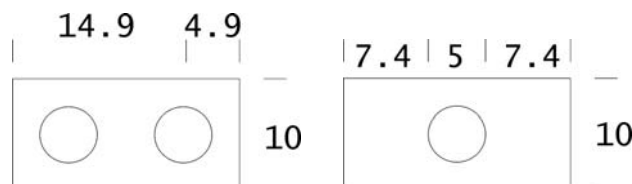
The bottom plates for the O-rings seen from above and side and the bottom plate for the tubes sketched as seen from the side (The dimensions are in mm)
